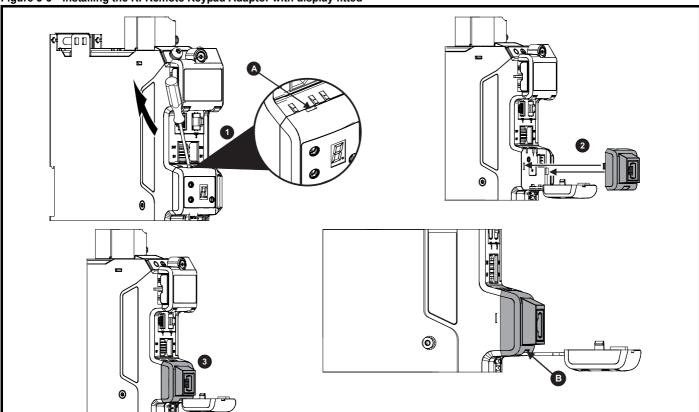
Installing the KI-Remote Keypad Adaptor with display fitted
